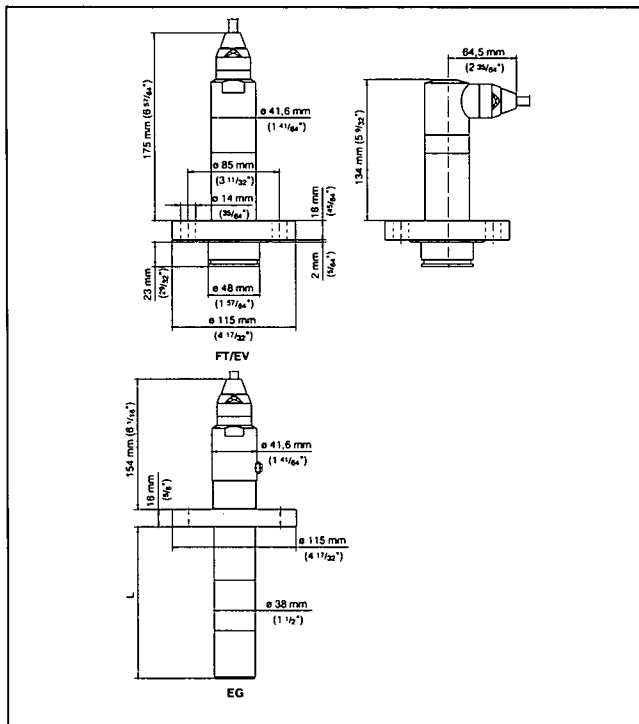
VEGABAR - extension fitting for paper industry: EV/FT = absolutely flush for pulper (EV 2-times flattened), EG = extension for ball valve fitting (L = order-specific)
